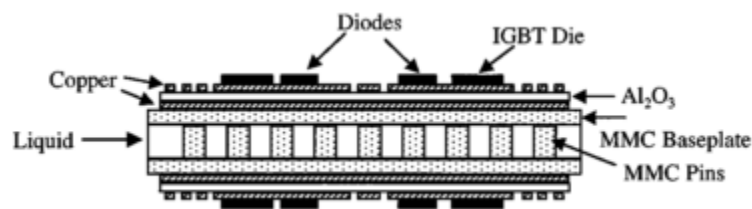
Cross sectional view of a IGBT module with liquid cooling [63].
